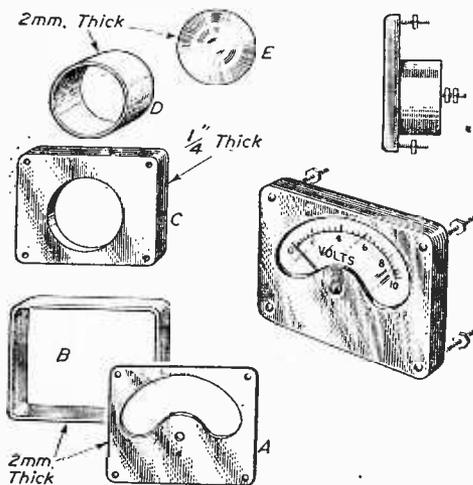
Component parts and finished meter case constructed from black acetate.
